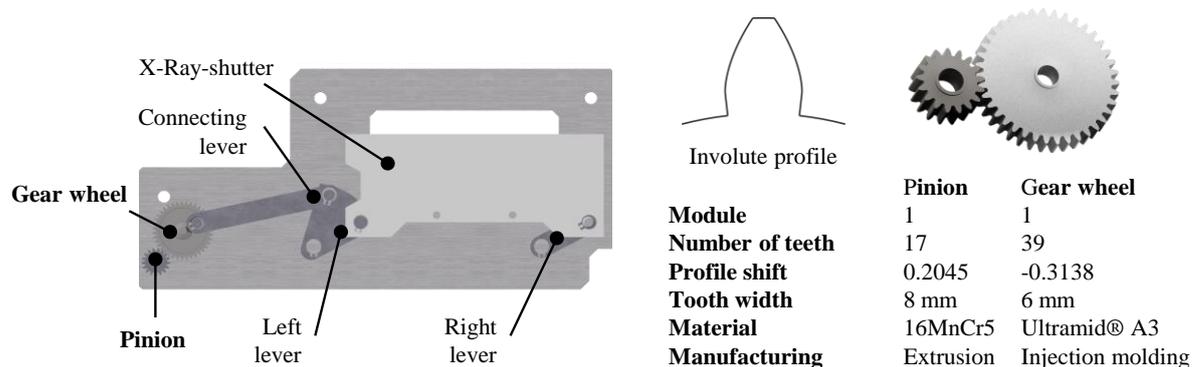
Demonstrator assembly and investigated gear pairing according to (Heling, *et al.*, 2017)
